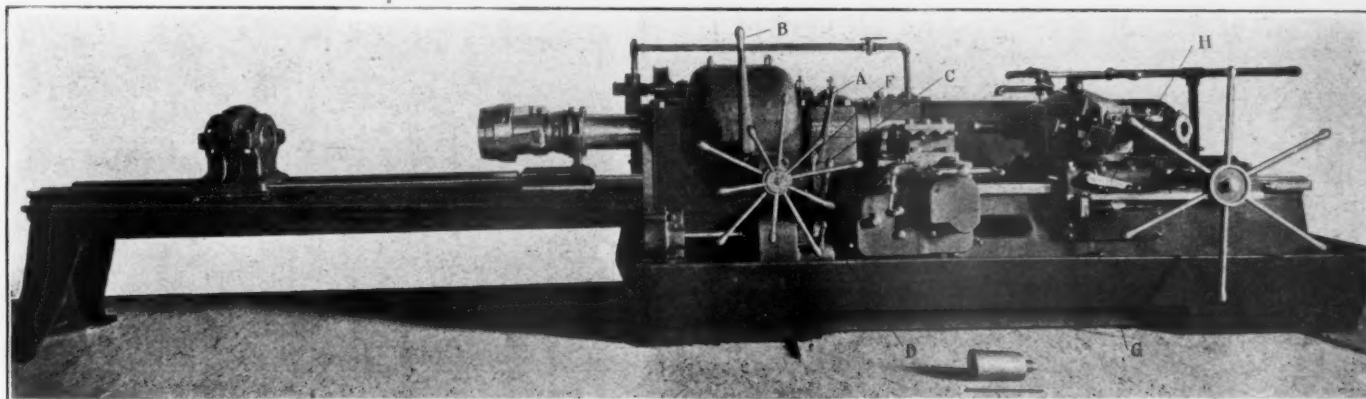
AUTOMATIC CHUCK TURRET LATHE.—BARDONS & OLIVER.
